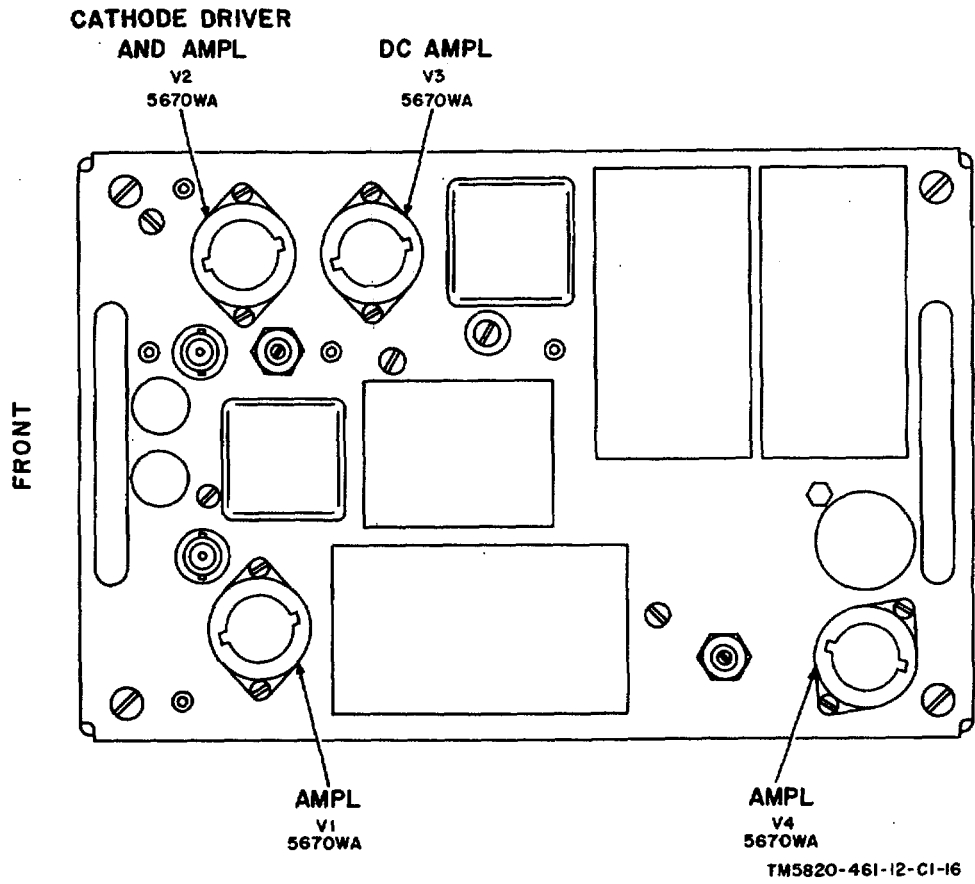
Baseband assembly 2A3 (part of T-893(P)/GRC), tube locations.
